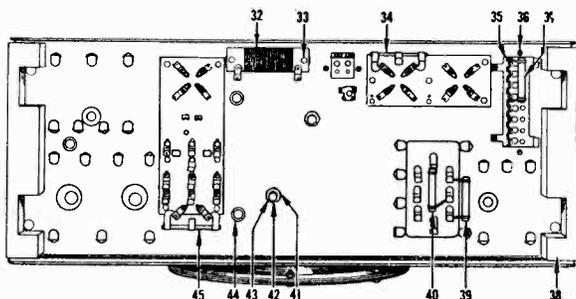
Bottom View of Amplifier-Speaker Unit, showing parts.
